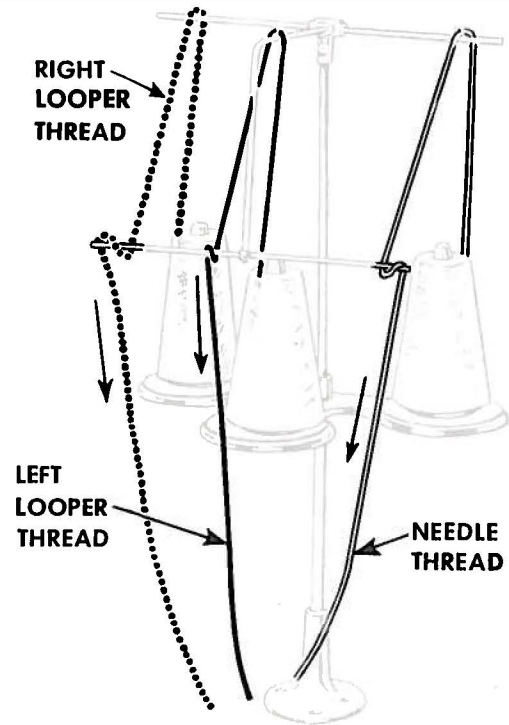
Unwinder 151031 Threaded for Three-Thread Stitch
